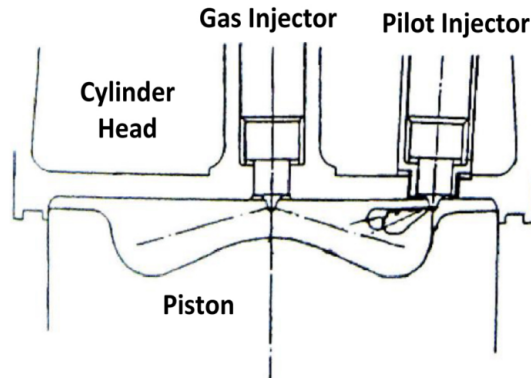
High-pressure center-mounted gas injector engine combustion chamber layout [98]
